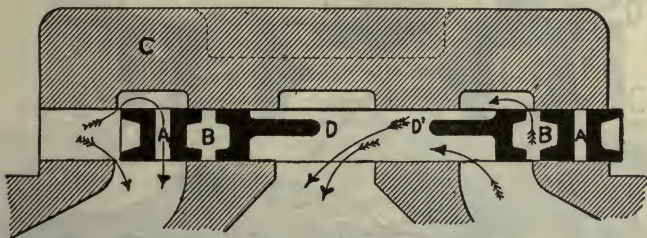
The Sweet pressure plate valve. C, is the pressure plate which relieves the valve of the steam pressure. This is a double ported valve with the second admission entering through the passage A. A separate passage B, is used for the second exhaust as seen in exhaust position at the other end of the cylinder.
